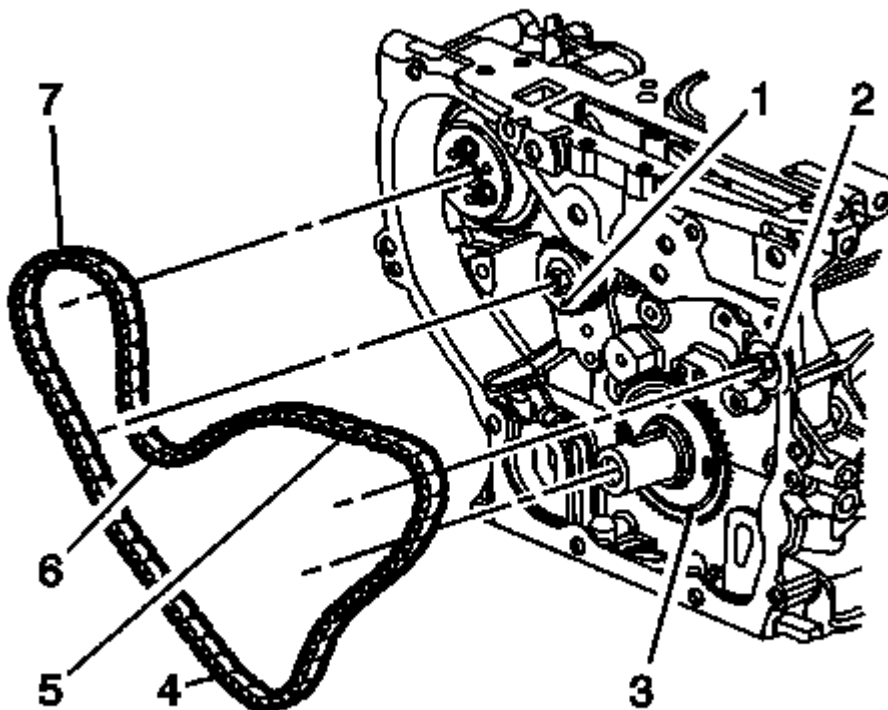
Identifying Balance Shaft Drive Chain & Components
